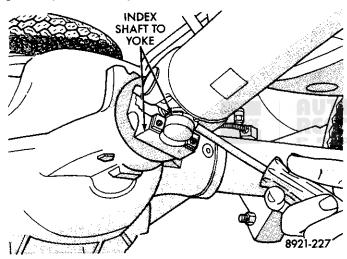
Mark Propeller Shaft And Yoke For Alignment Reference
